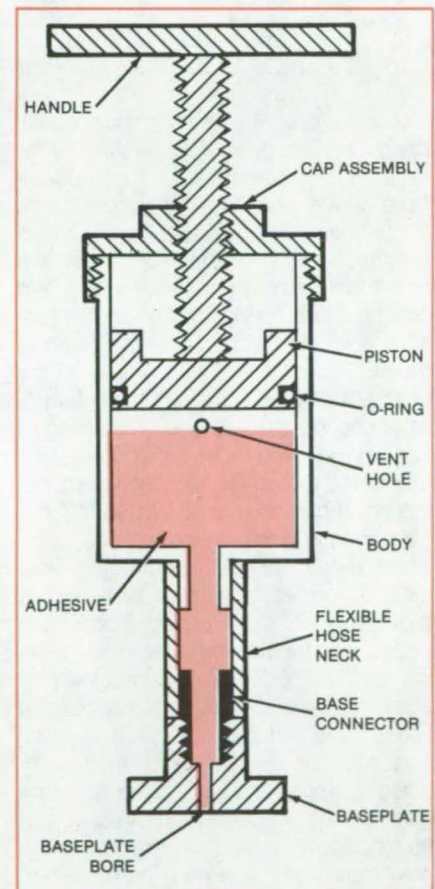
The Injection Repair Tool consists of three main sections: baseplate, body, and piston/handle/cap assembly. The sections are separable.
